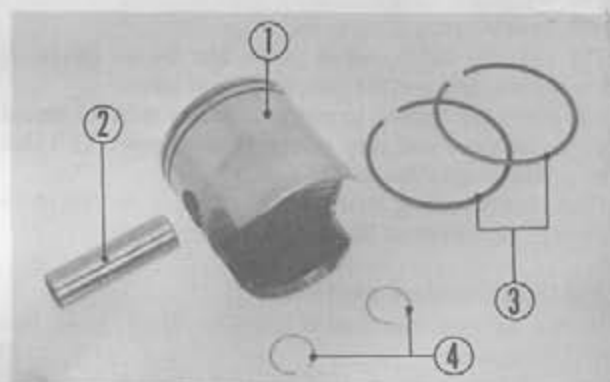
① Piston ② Piston pin ③ Piston ring ④ End ring
